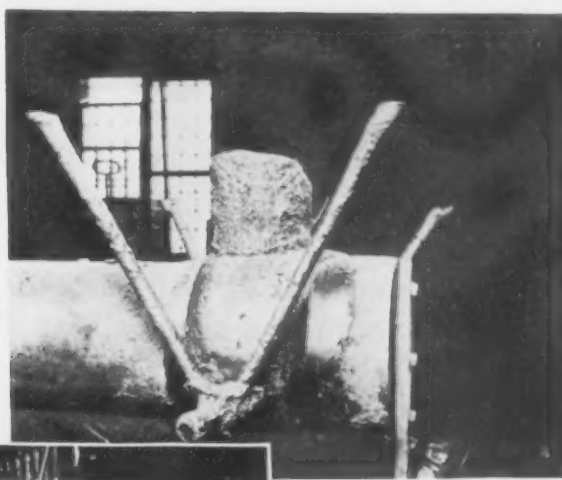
An Extension 17 In. Long. Welded to a 20-In. Blooming Mill Crankshaft. The views show the crucible in place
